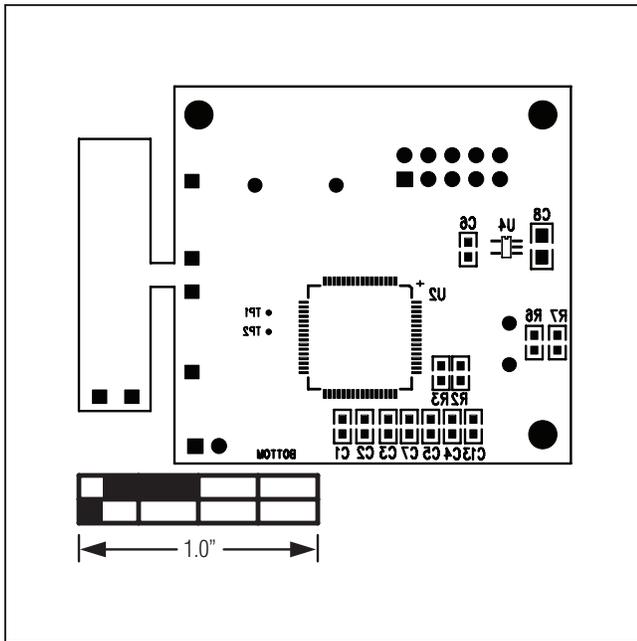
MAXADC-RTD Component Placement Guide—Solder Side
